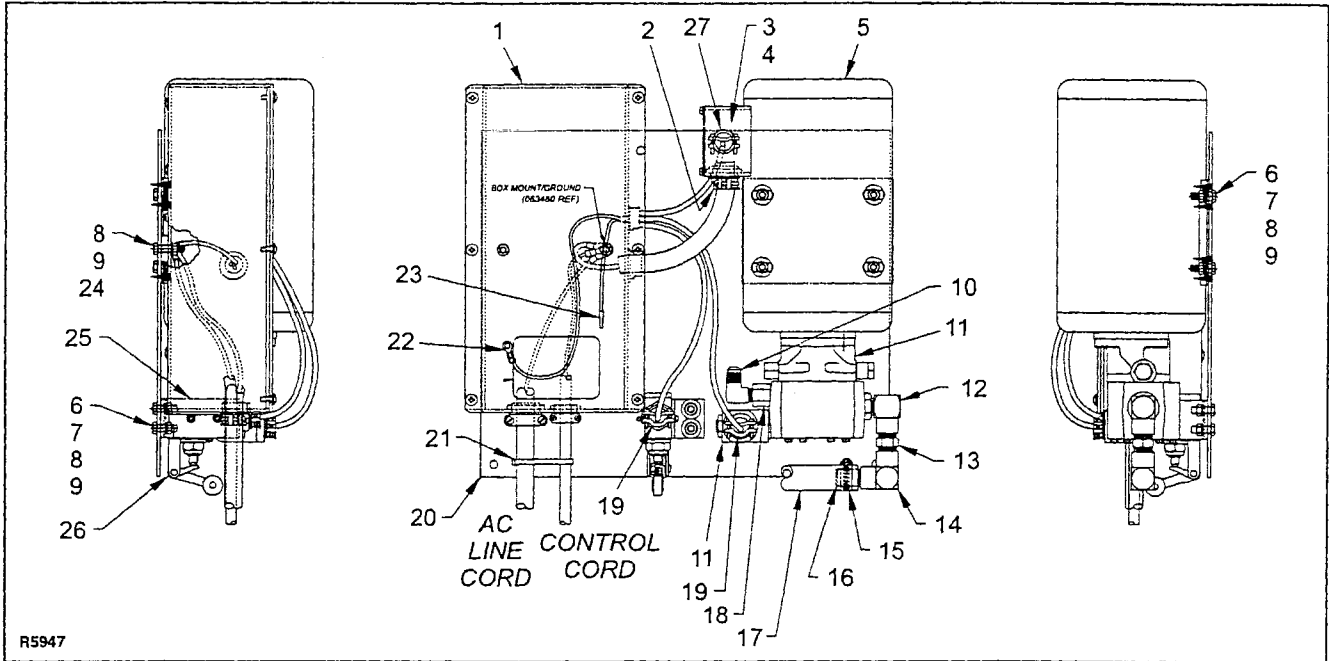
Lift Table Panel Assembly (36/48/60" Tables)
